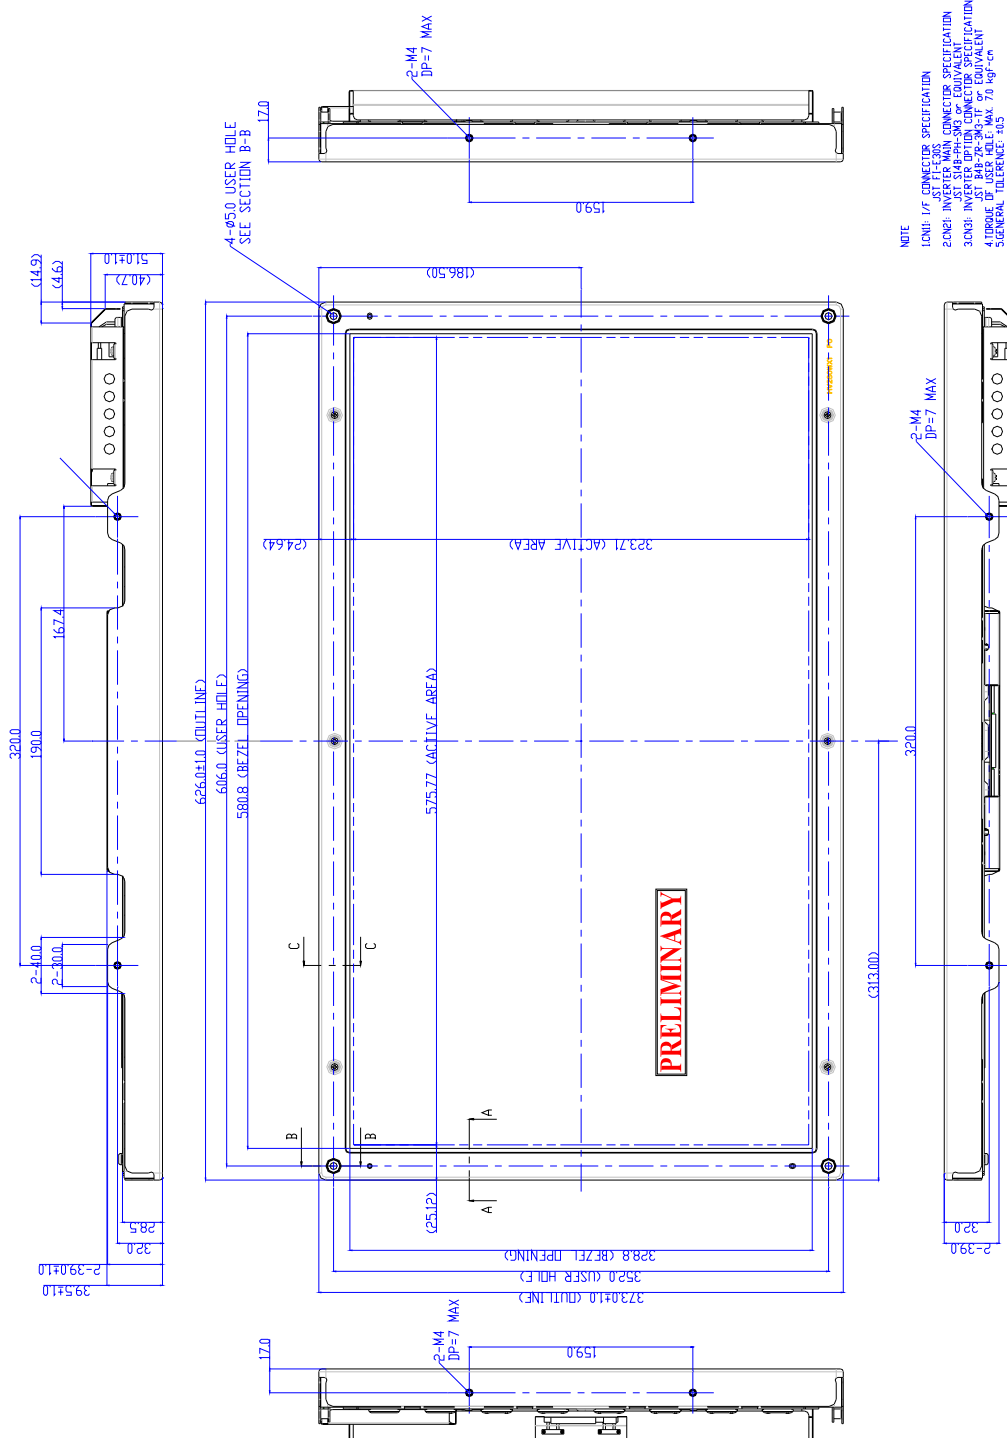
TFT-LCD Module Outline Dimensions (Front view)
